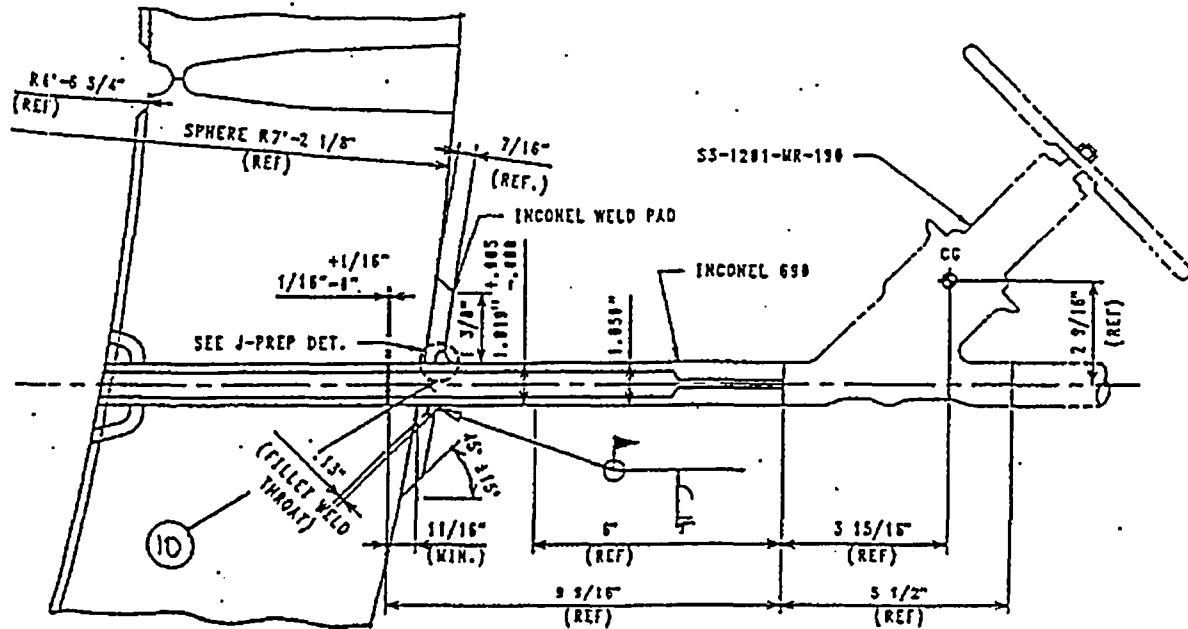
Illustration Showing the Replacement Nozzle Design for the Steam Generator Primary Head.
